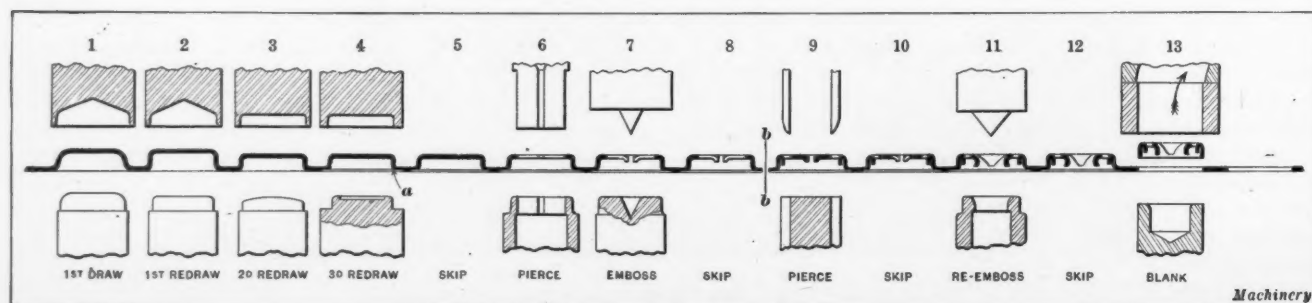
Diagrammatic View of Upper and Lower Set of Tools and Strip, showing Progressive Steps in making Socket
